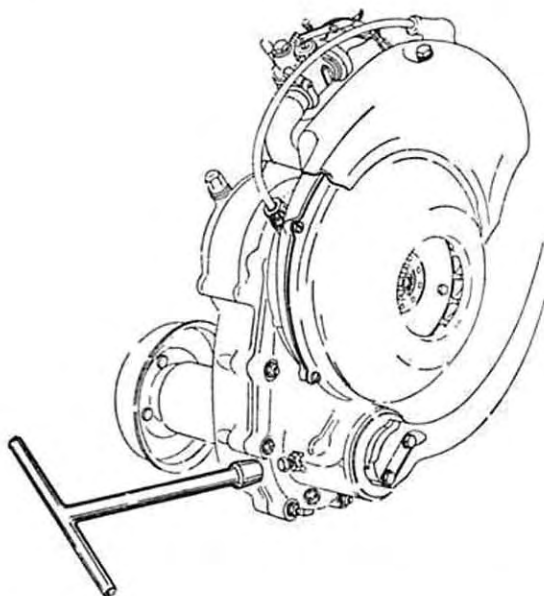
Box Spanner for Lock Nut of Tapered Screw.
